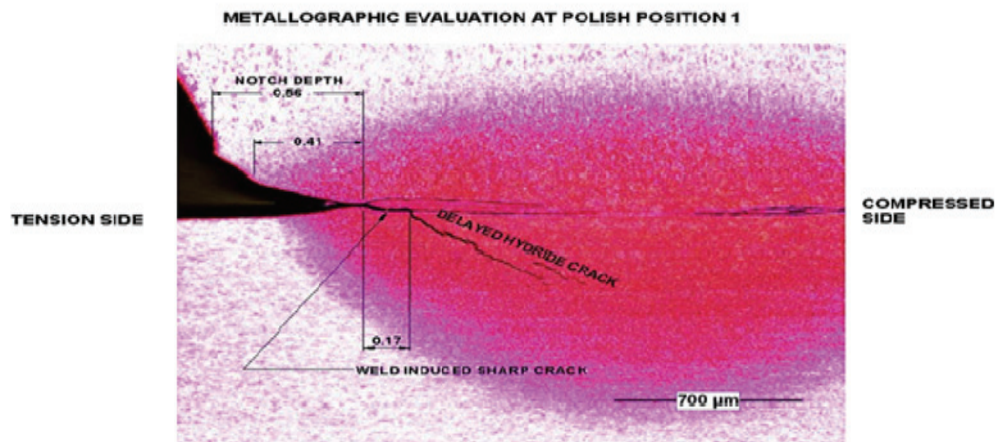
Metallographic Section of Sample Showing the Weld Notch. Weld Discontinuity and DHC Crack (Test 07-09)
